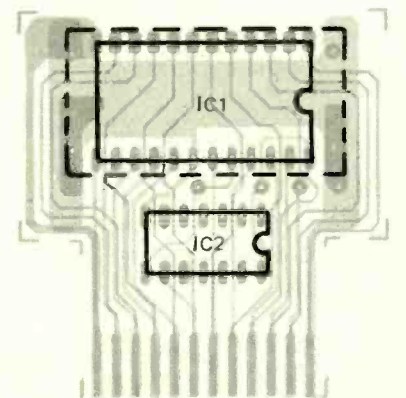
PARTS-PLACEMENT DIAGRAM. The dashed box around IC1 is a shield made of copper foil. That shield is tack soldered to the PC board.
